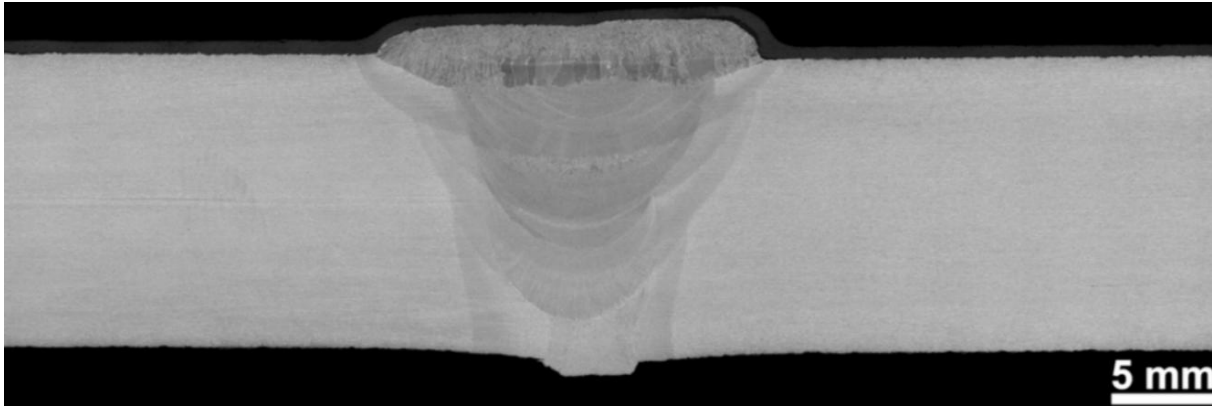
Macrograph of the structures present in the girth weld of the X60B steel pipe.
